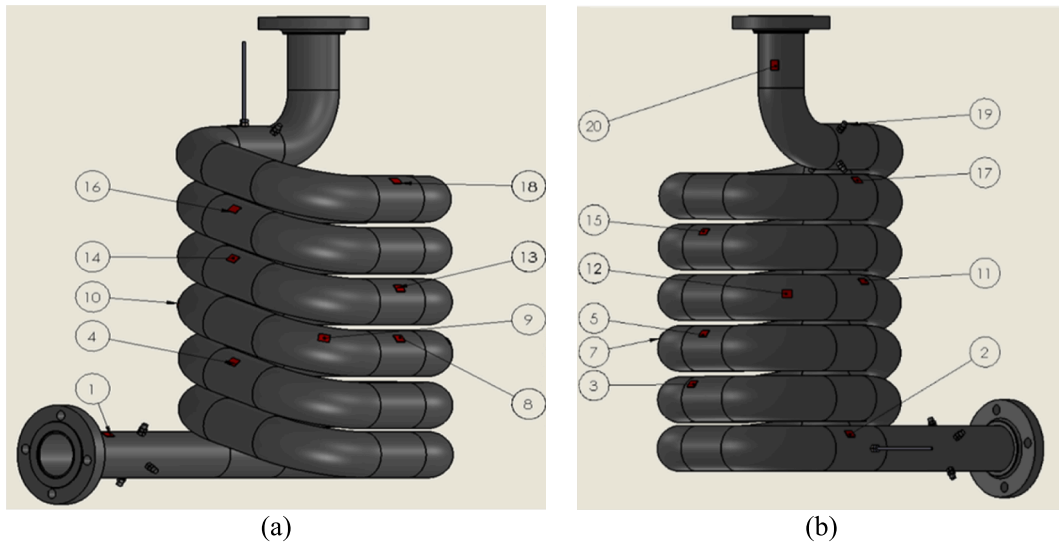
Weld-on thermocouple arrangement along receiver pipe (a) front and right side, and (b) back and left side.
